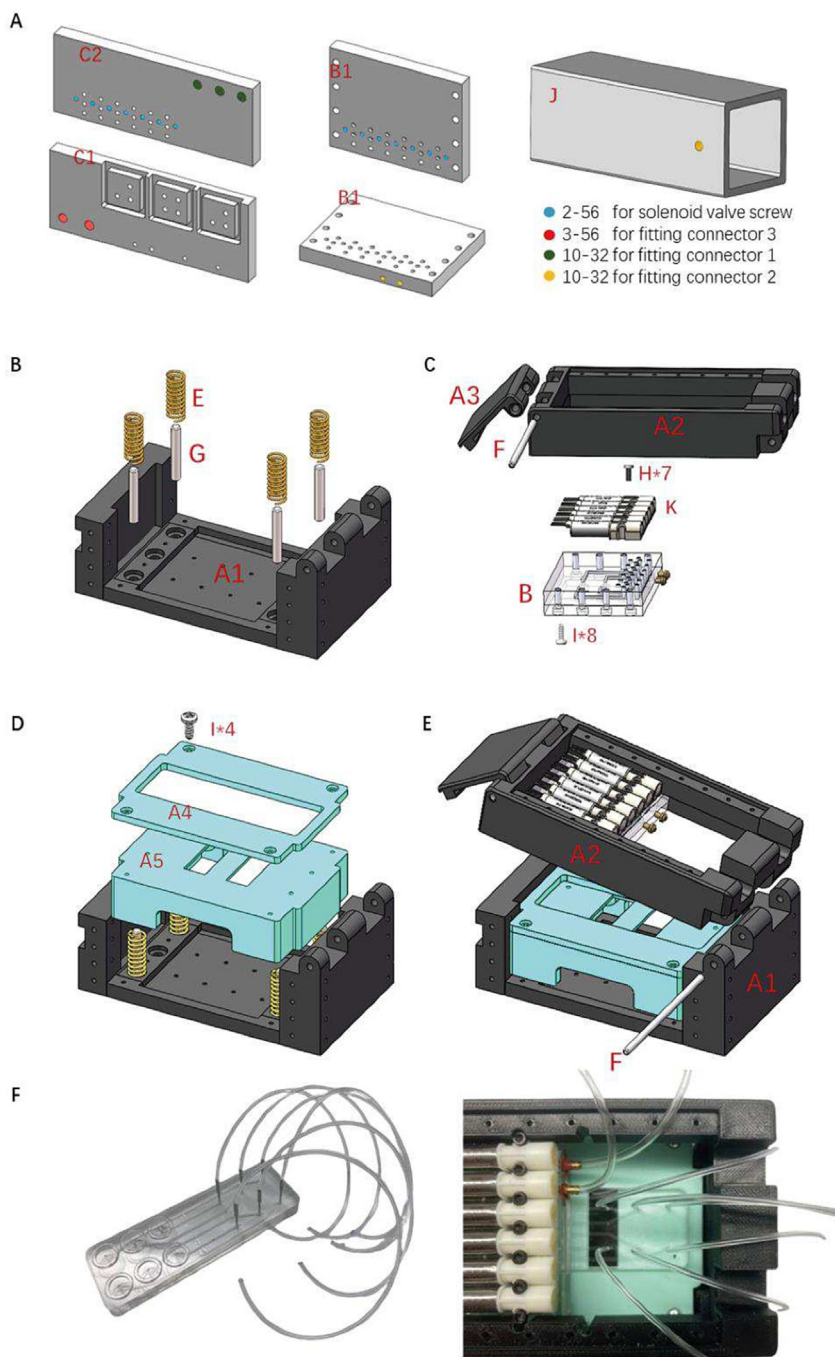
Mechanical assembly guide. (A) Drilling and tapping (B) Base holds the 4 mm rod and die spring. (C) Screw the solenoid valves on the cartridge manifold, then attach the cartridge manifold to the cover. Join the cover and the cover lock with a 3 mm rod. (D) Screw the positioner on the spring stage. Then fit the stage into the base. The stage will be supported by the springs. (E) Join the assembled cover and base with a 3 mm rod. (F) The adapter cartridge can turn the system into a general-purpose pressure source with six output ports. Insert six 22-gauge needles into the output ports of the cartridge. Use silicone tubing with proper inner diameter to connect the system to external microfluidic chips. Parts are labeled as follows: A1-Base, A2-Cover, A3-Cover lock, B1-Top piece of cartridge manifold, C1-Tank side piece of tank manifold, C2-Valve side piece of tank manifold, E-Spring, F-3 mm rod, G-4 mm rod, H-Flat screw, I-Self tapping screw, J-Air tank, K-Solenoid valves.
